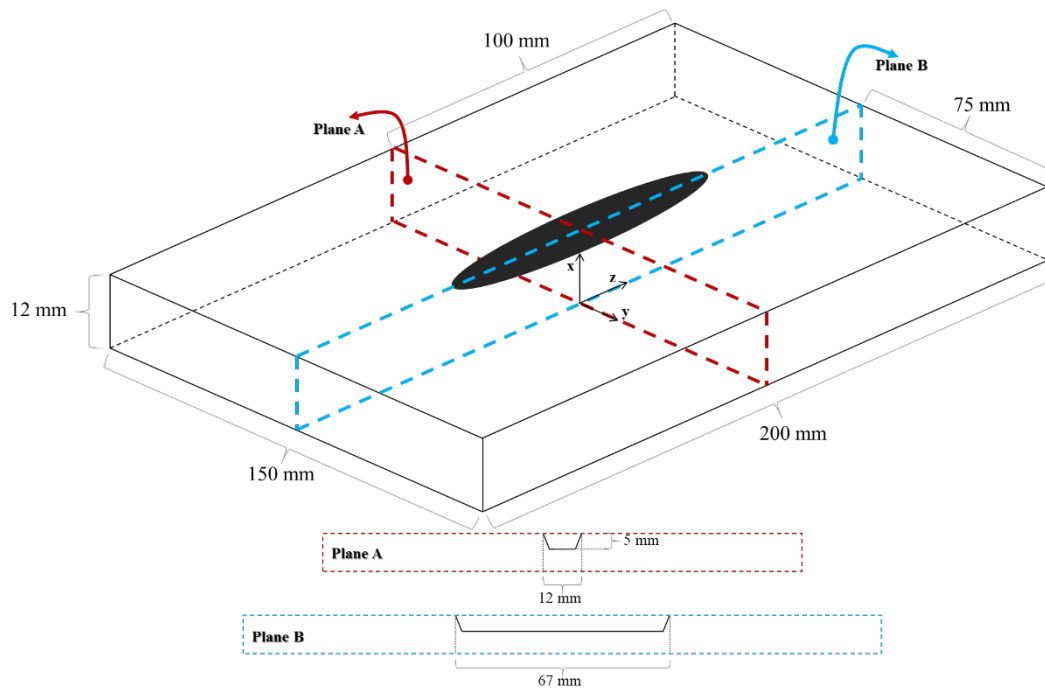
Three-dimensional representation of bead-on-plate weldment geometry (Uzun and Korsunsky, 2019a, 2018).
